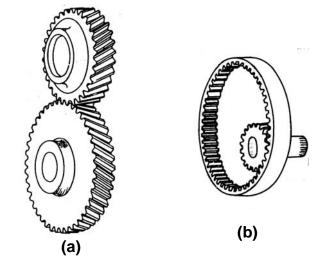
Configuration of (a) external and (b) internal gears
